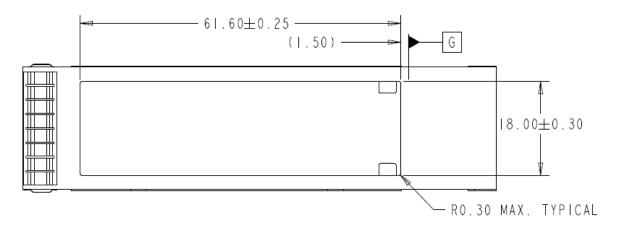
Cutout for a riding heat sink in the OSFP-RHS cage
